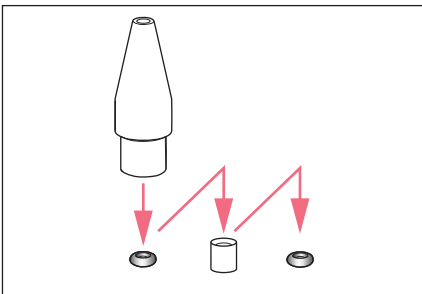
Cross section with correctly positioned o-rings and spacing sleeve
